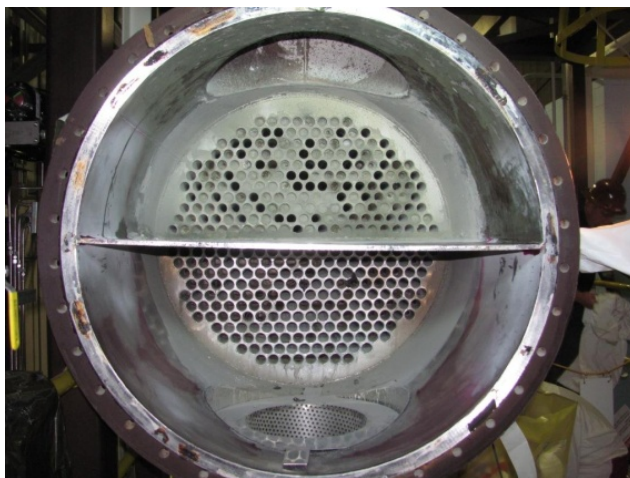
shows the 3/8-in thick, Alloy 625 pass partition plate welded to the 3/16-in thick shell
